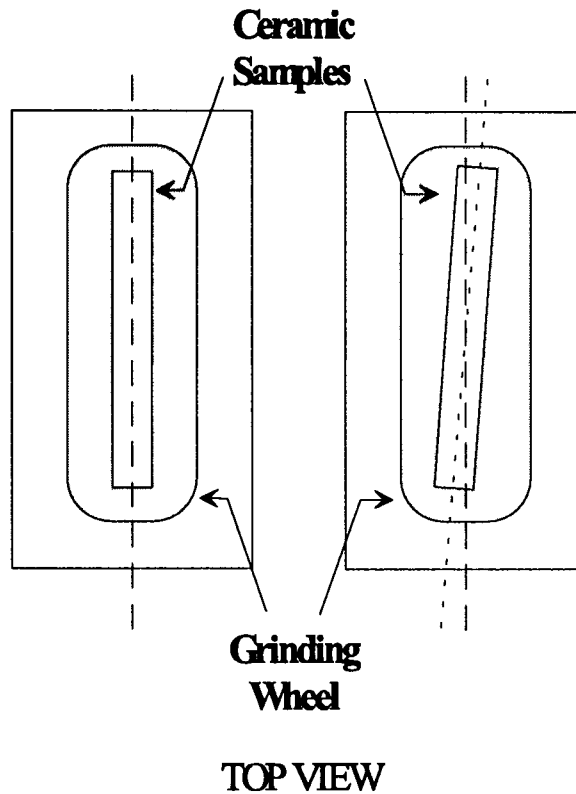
Proper (left) and Improper (right) Alignment of Wheel-Wear Specimens to the Grinding Wheel
